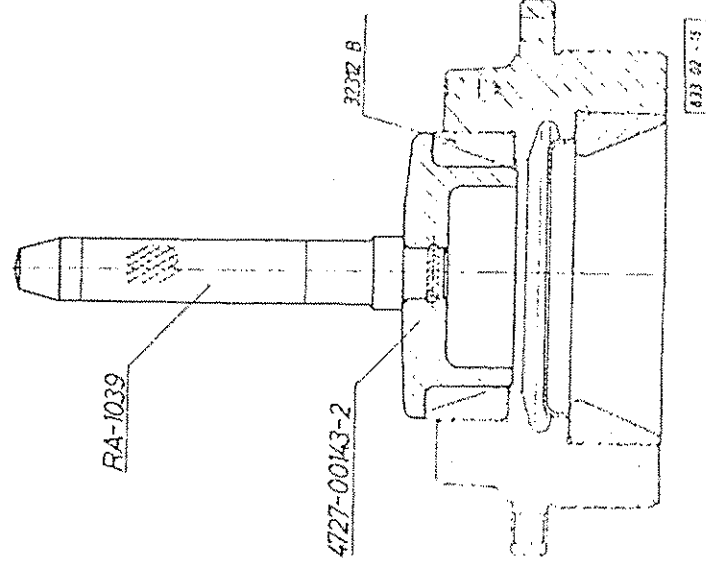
DRIVING IN THE CUP OF OUTER TAPER ROLLER BEARING
